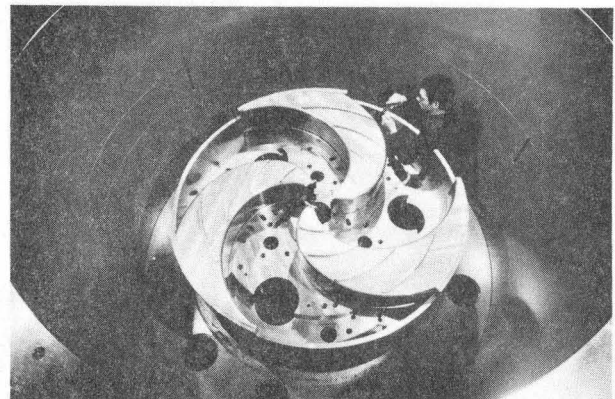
View of the lower set of polar expansions assembled on the pole
